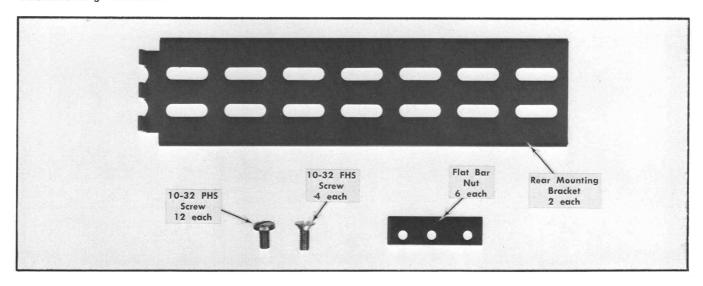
Small hardware components for mounting the stationary sections to the rack rails.
